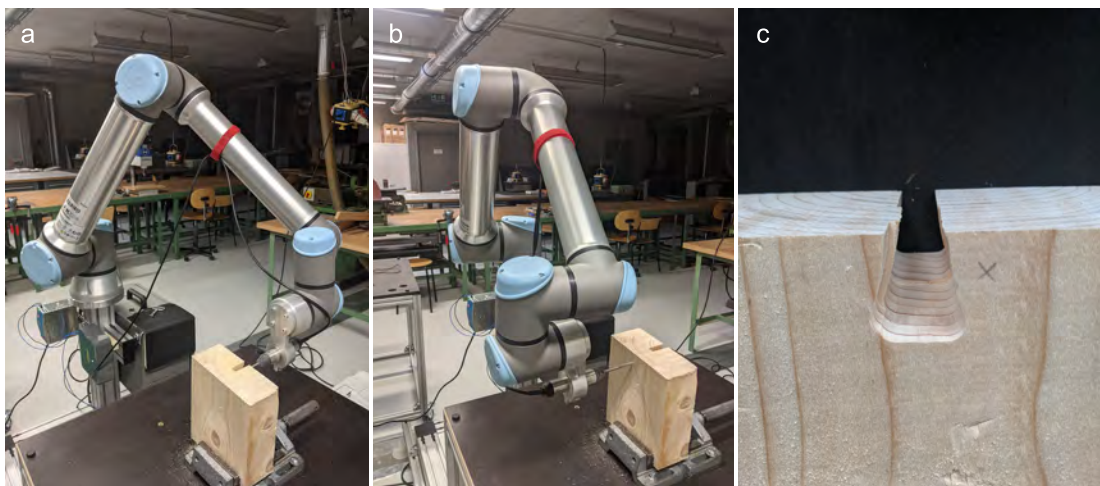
Spline joint milling. a) & b) Milling of the first and second pockets. c) Inaccuracies that were probably caused by the robot's mechanics and had to be adjusted for.
